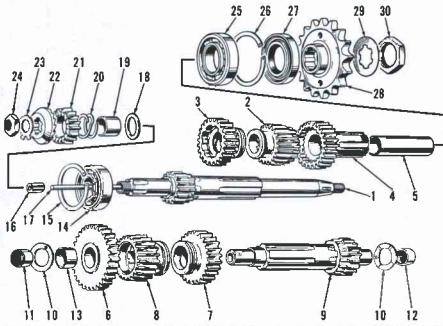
Exploded view of four speed transmission assembly. Refer to Fig. TM4-33 for assembled view.
